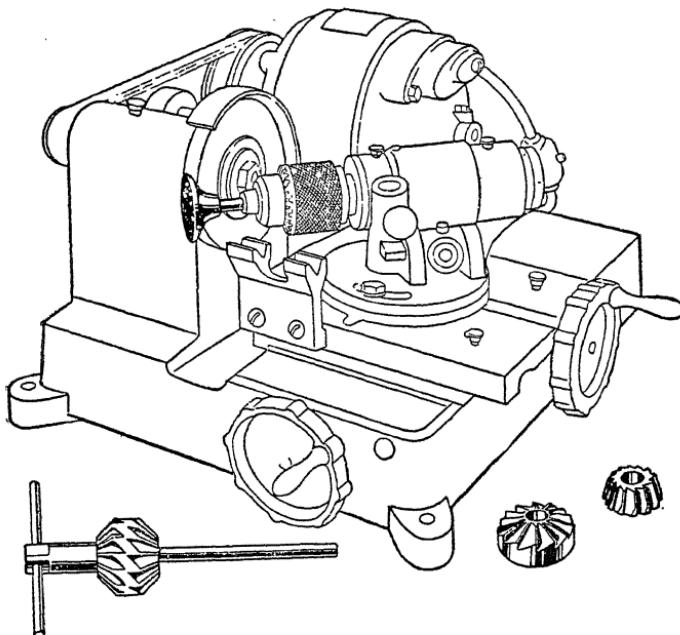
Electric Valve Refacing Machine with Valve Reseating Cutters
